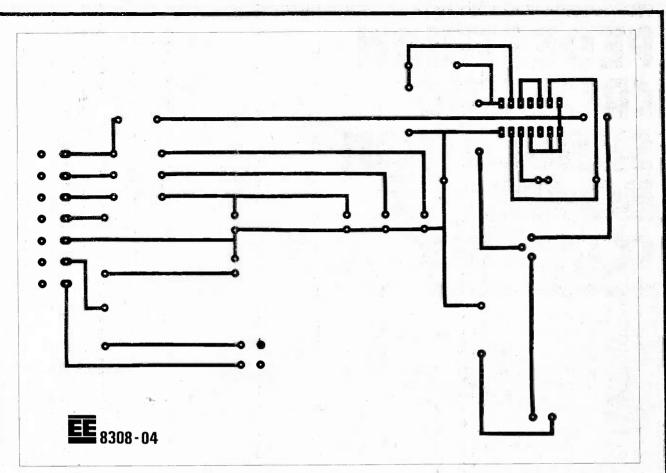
The actual size master p.c.b. pattern to be etched for the Pedestrian Crossing Simulation board. (This board is available from the EE PCB Service Order code 8306-04.)
